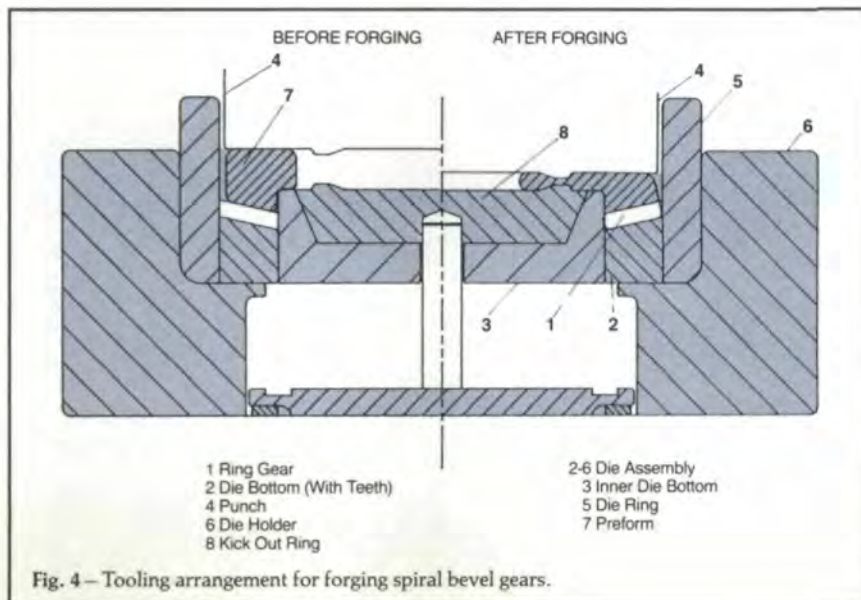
Tooling arrangement for forging spiral bevel gears.
